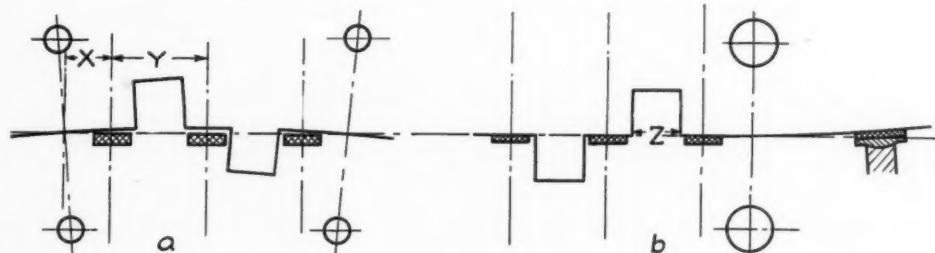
Schematic representation of conditions with engine design provided with three or more bearings, and revised design
